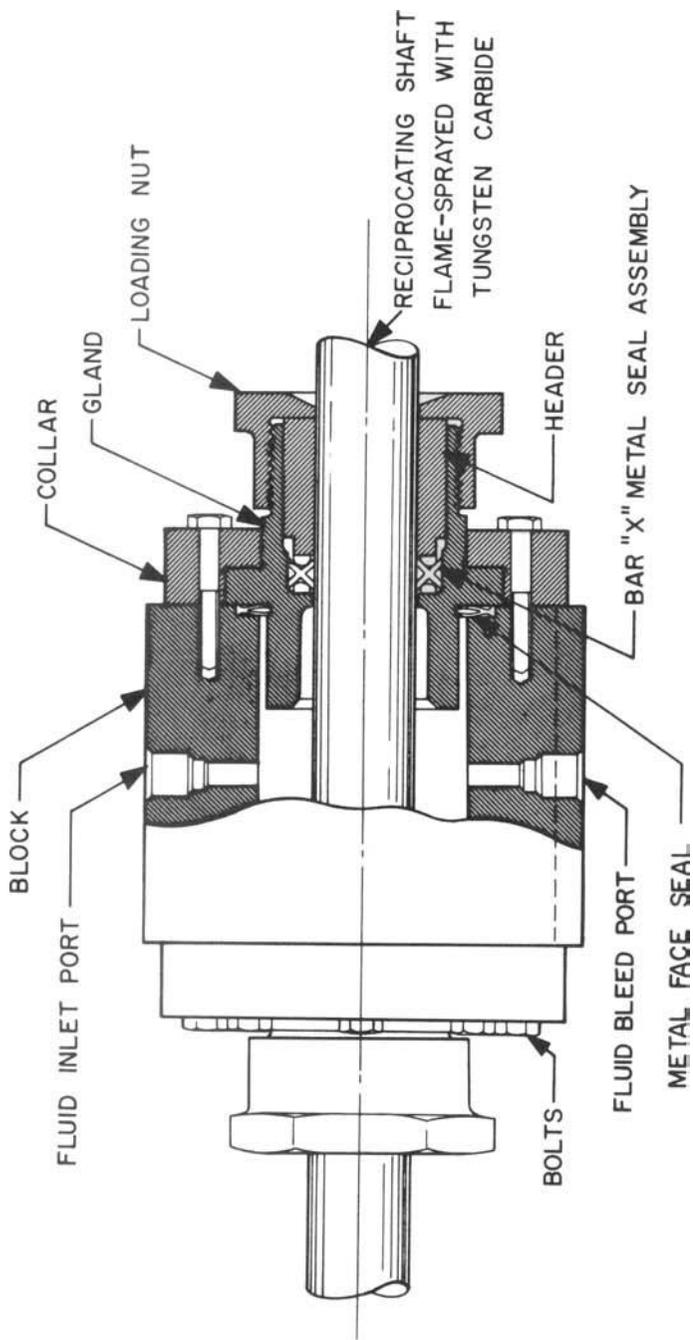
FLUID EVALUATION SEAL TEST GLAND .
